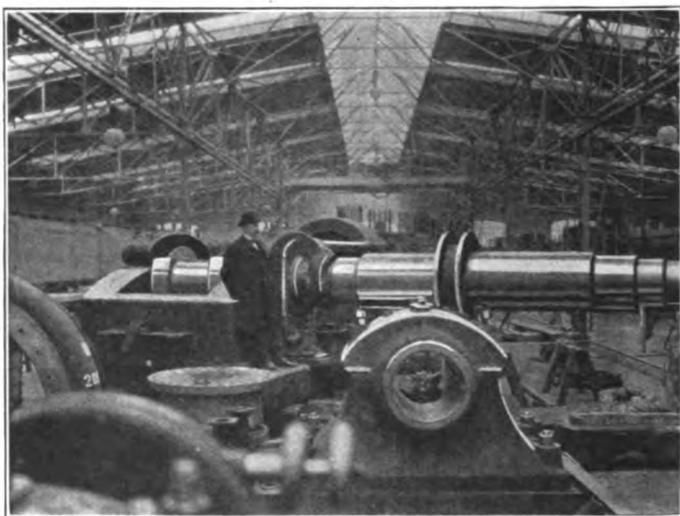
Crank Shaft for 1,200 H.P. Nürnberg Engine.
